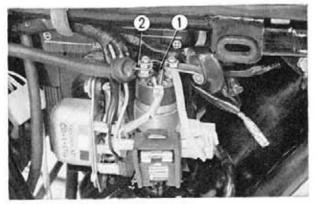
① Magnetic switch ② Starting motor cable
